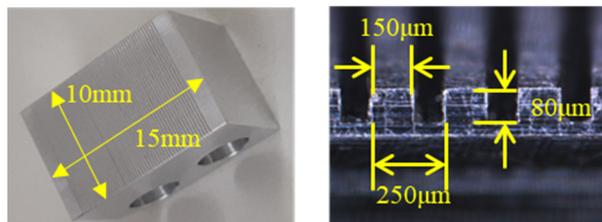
Manufactured grating. Right figure shows a magnified view of the grating surface.
